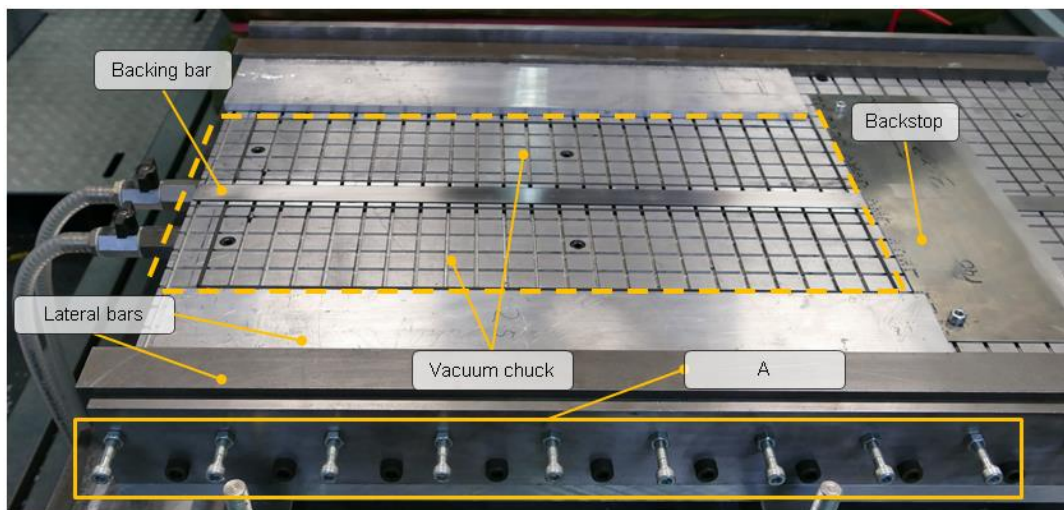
Fixturing system (Courtesy of TWI,Ltd).
